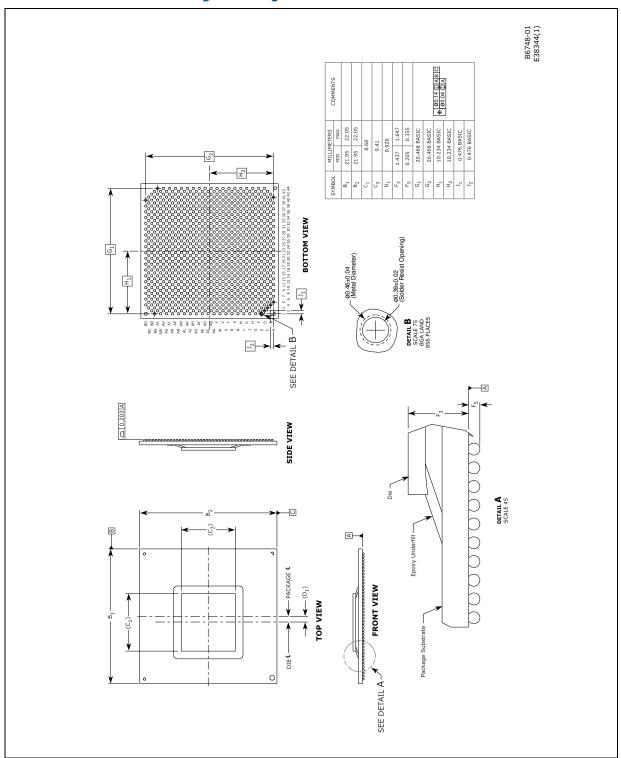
Intel Core 2 Duo Mobile Processor (ULV SC and ULV DC) Die Micro-FCBGA Processor Package Drawing
